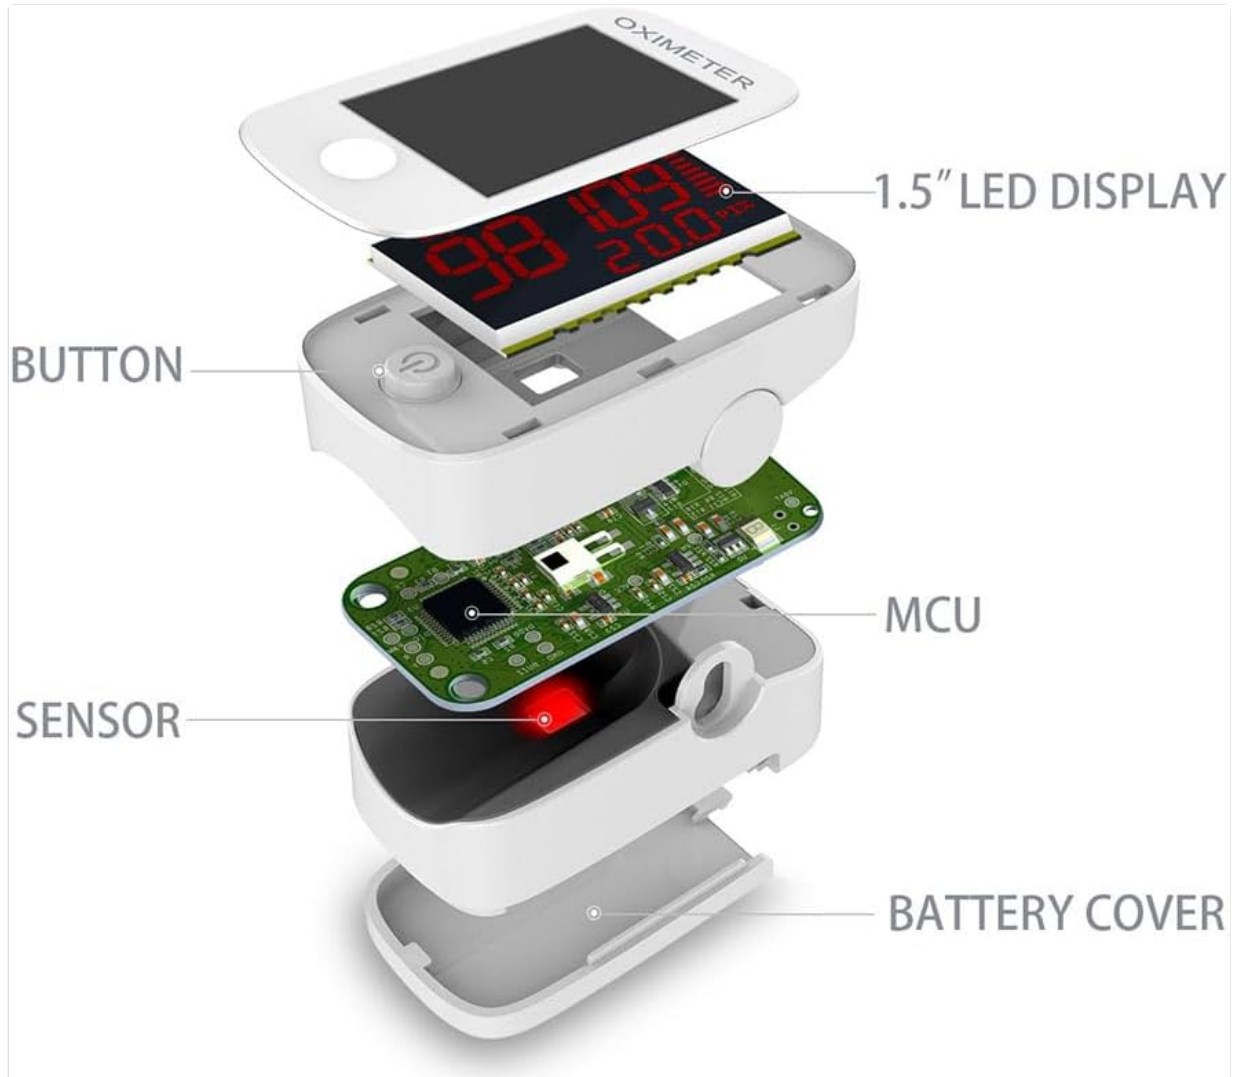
Exploded view of the YM101 Pulse Oximeter components.
